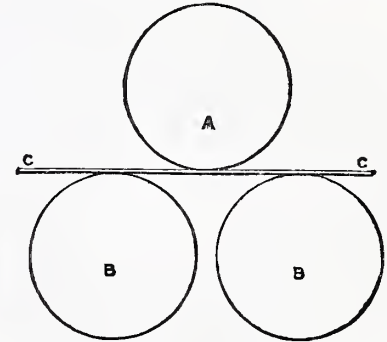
Arrangement of Rolls in Plate-Bending and Straightening Machine.
